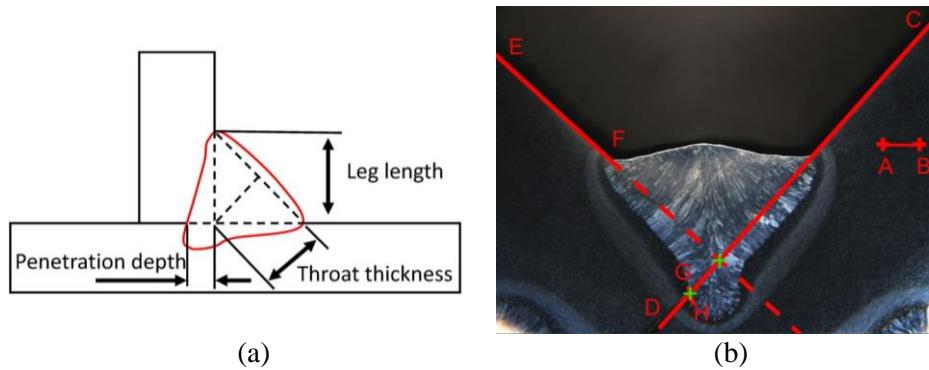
Illustration of weld bead geometry and CSV of welded specimen; (a) defined bead geometry, (b) CSV of welded specimen [13]
